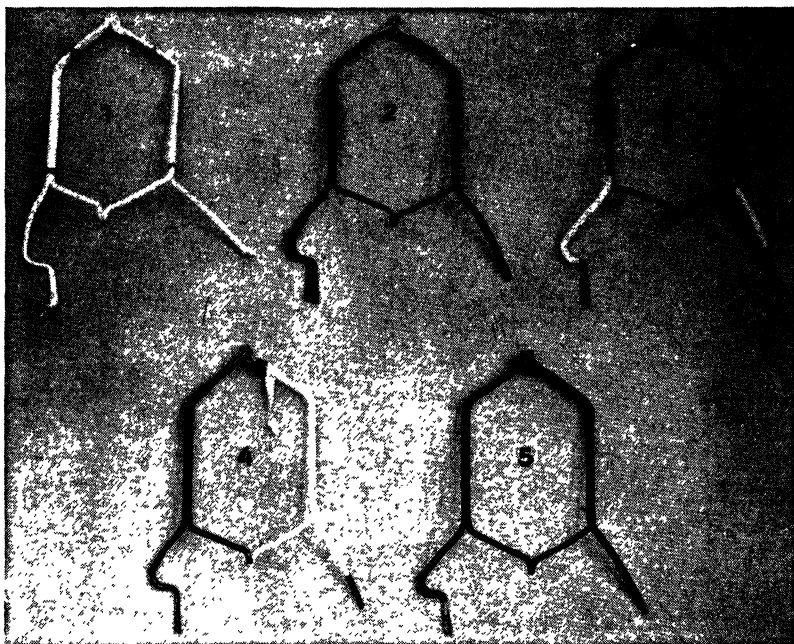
Five Armature Coils for D-C Motor or Generator. View Approximately One-sixth Size, Showing Successive Steps in Molding and Insulating.
